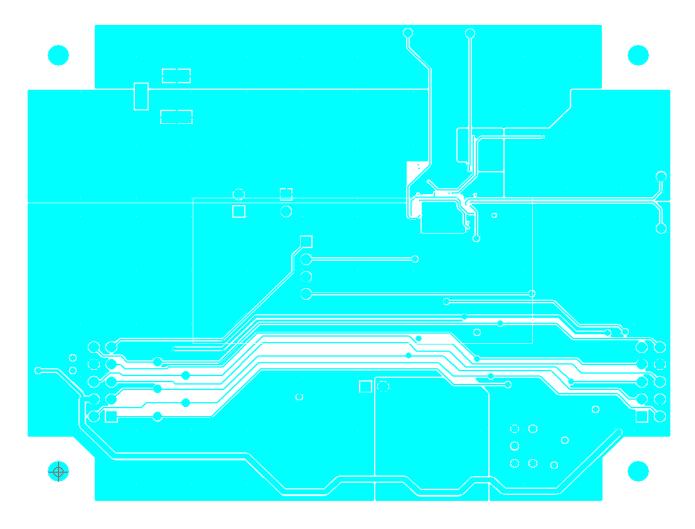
PCB - INNER LAYER 2 (VIEWED FROM TOP)
